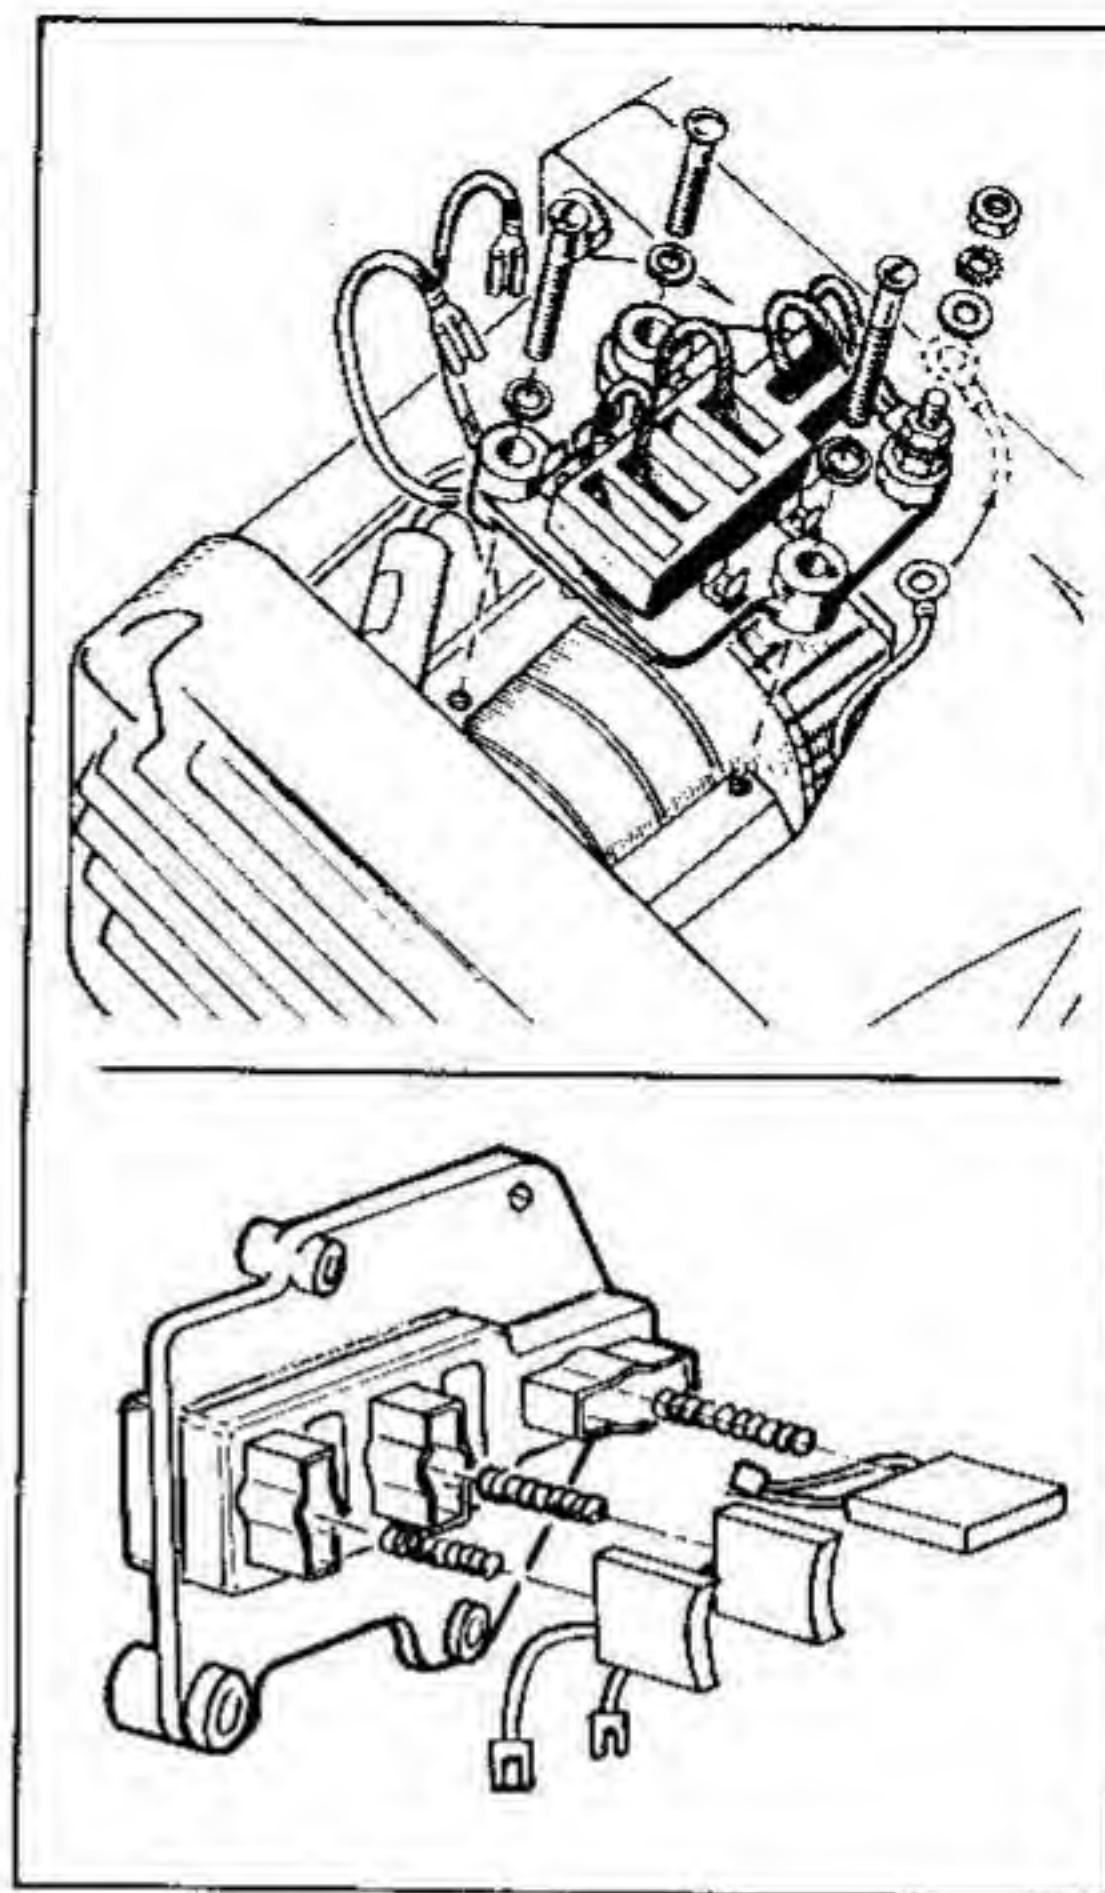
GENERATOR BRUSH REMOVAL
